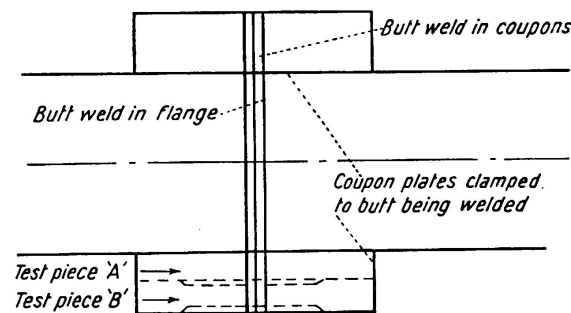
Coupons Cut to Give Test Piece "A" For Bending Test Piece "B" For Tensile.
